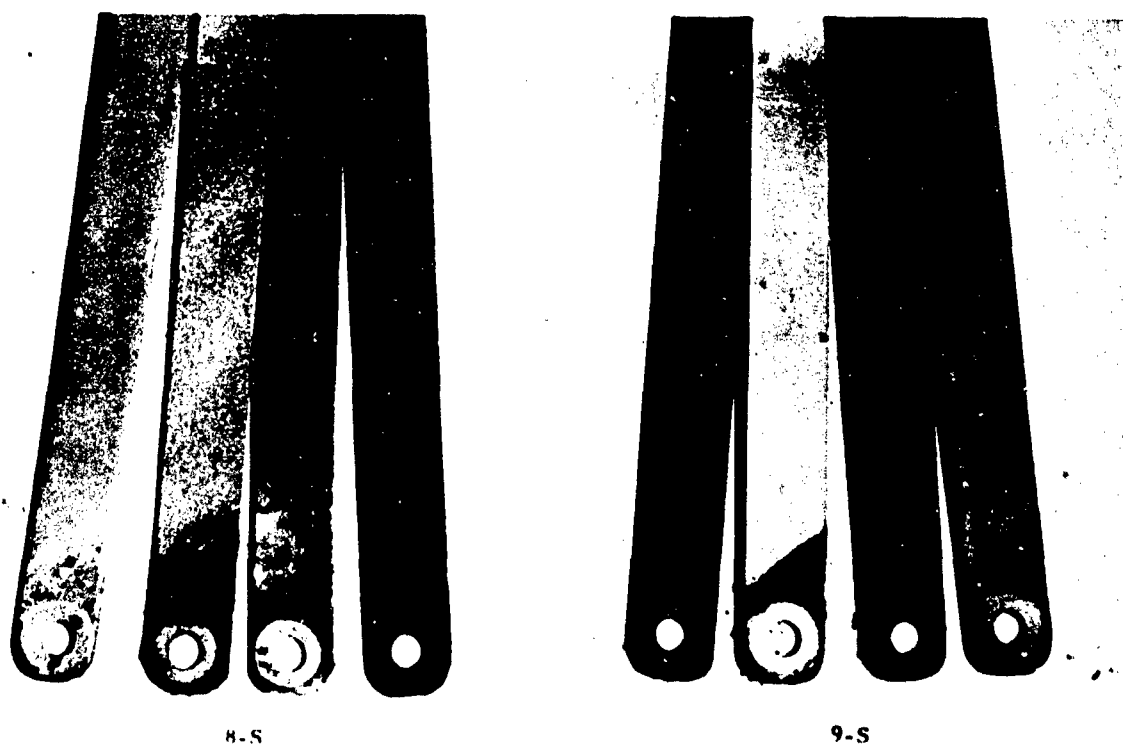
SPECIMEN ASSEMBLIES 8S AND 9S
